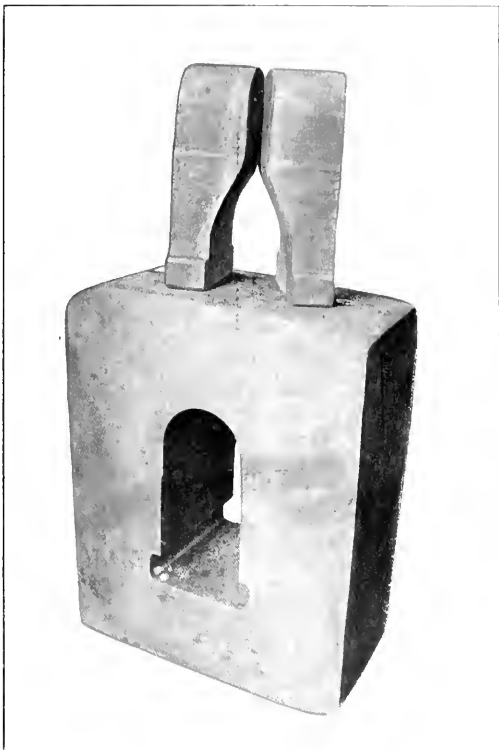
Cup and Blocks for Forming Spring Hanger Shown in Fig. 1
